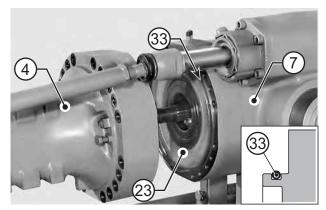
Fit a new o-ring (33) on the brake cylinder (23). Connect the complete arm (4) to a hoist and install it in the main body (7).
